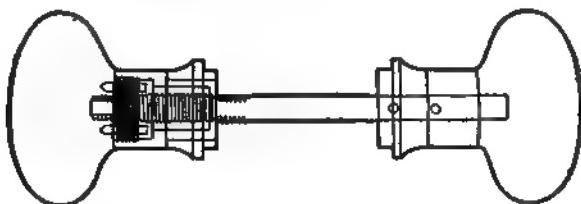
Russell & Erwin Screwless-Shank Knob-Mounting.
